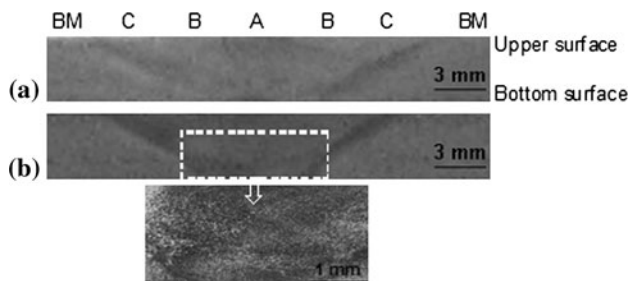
Macrostructures of the cross sections perpendicular to the welding directions of (a) A1 and (b) PWA1 welds
